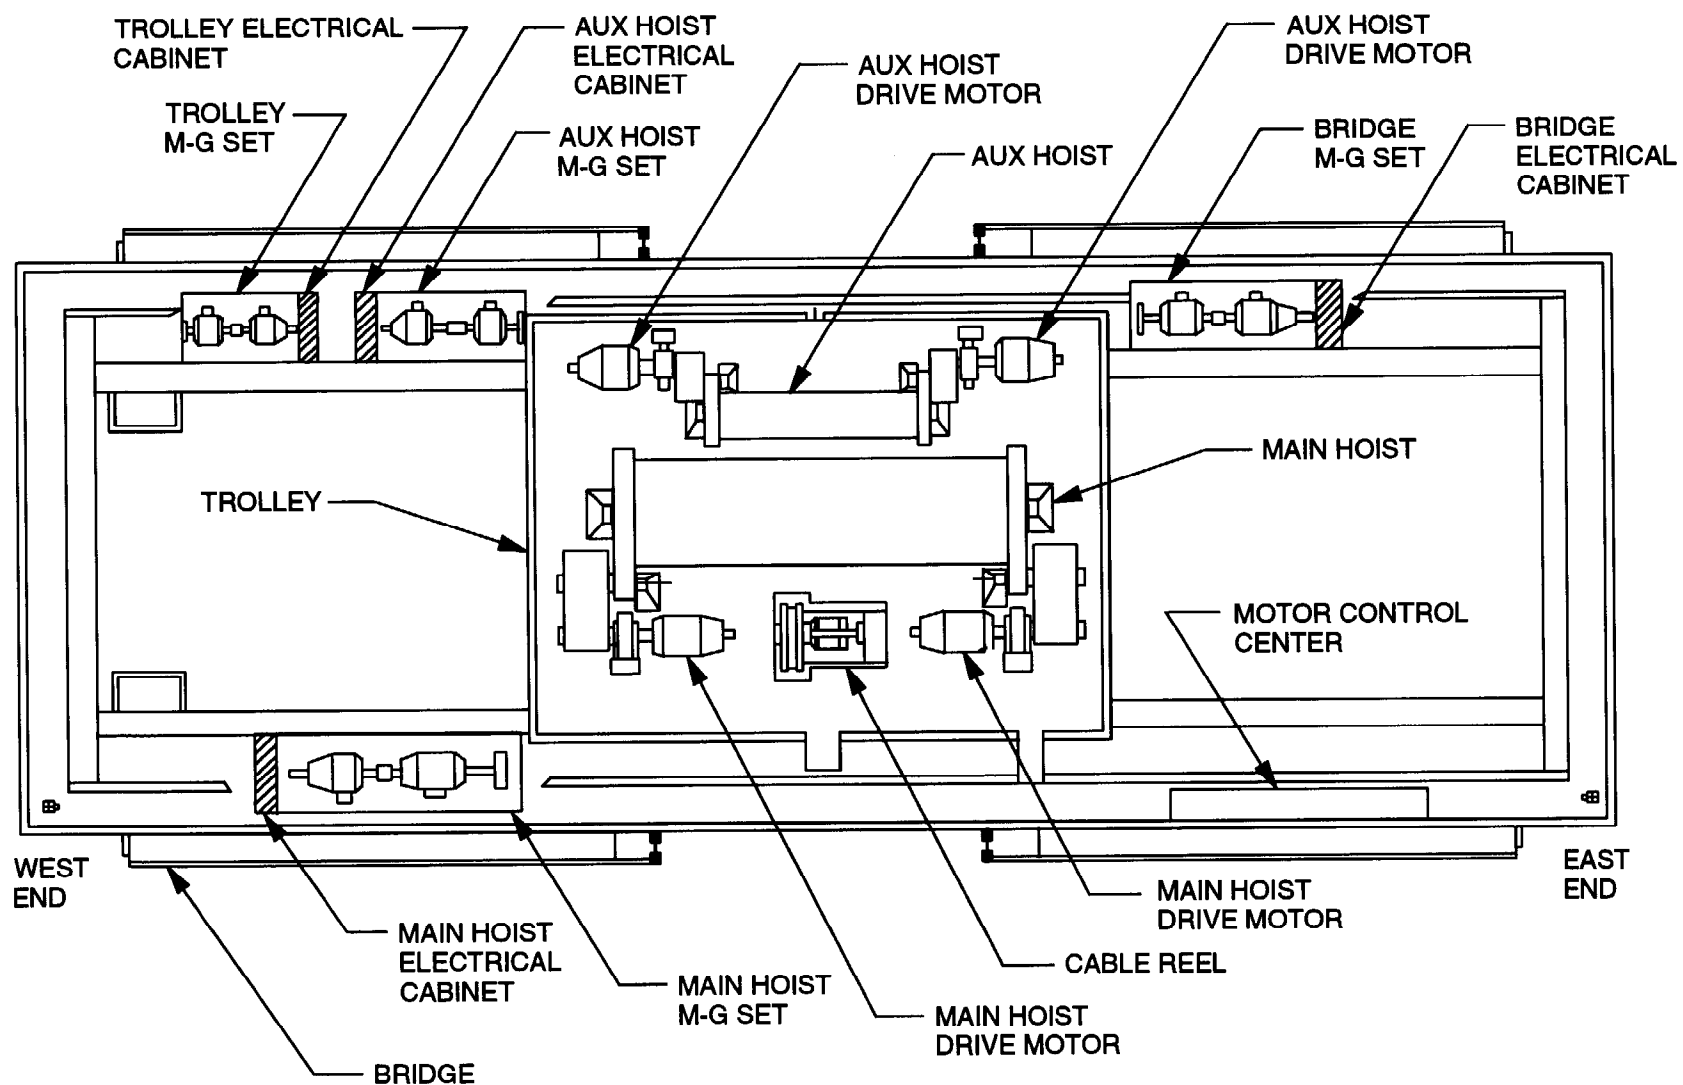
VAB 175-TON BRIDGE CRANE, PLAN VIEW
